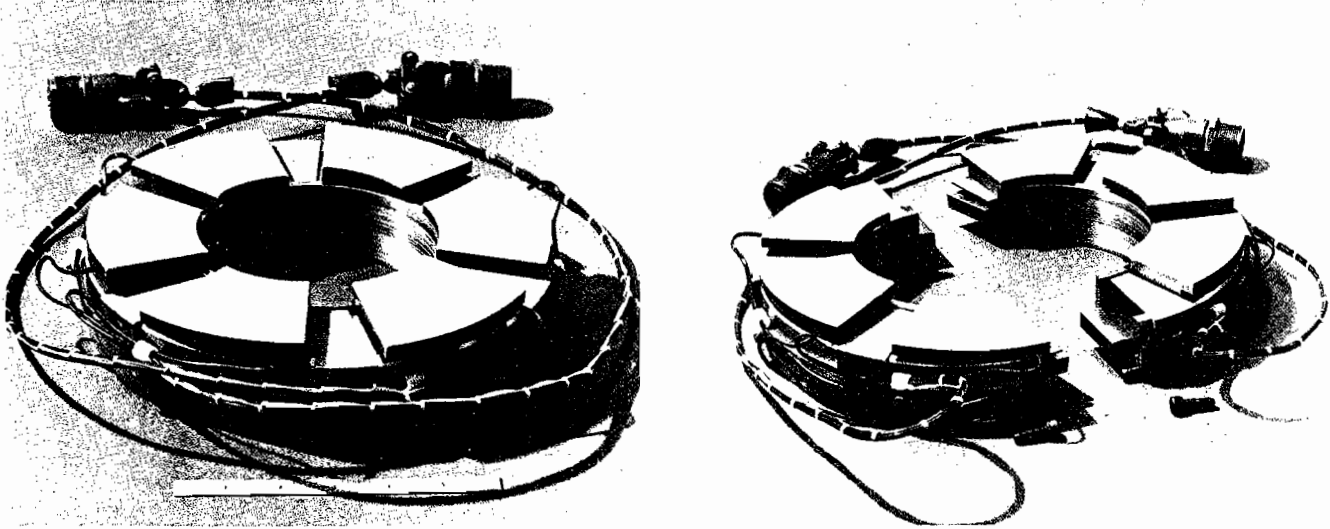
A. Oil Lubricated Tilting Pad Equalized Thrust Bearing for Steam Turbine Operating at 10,000 rpm.
